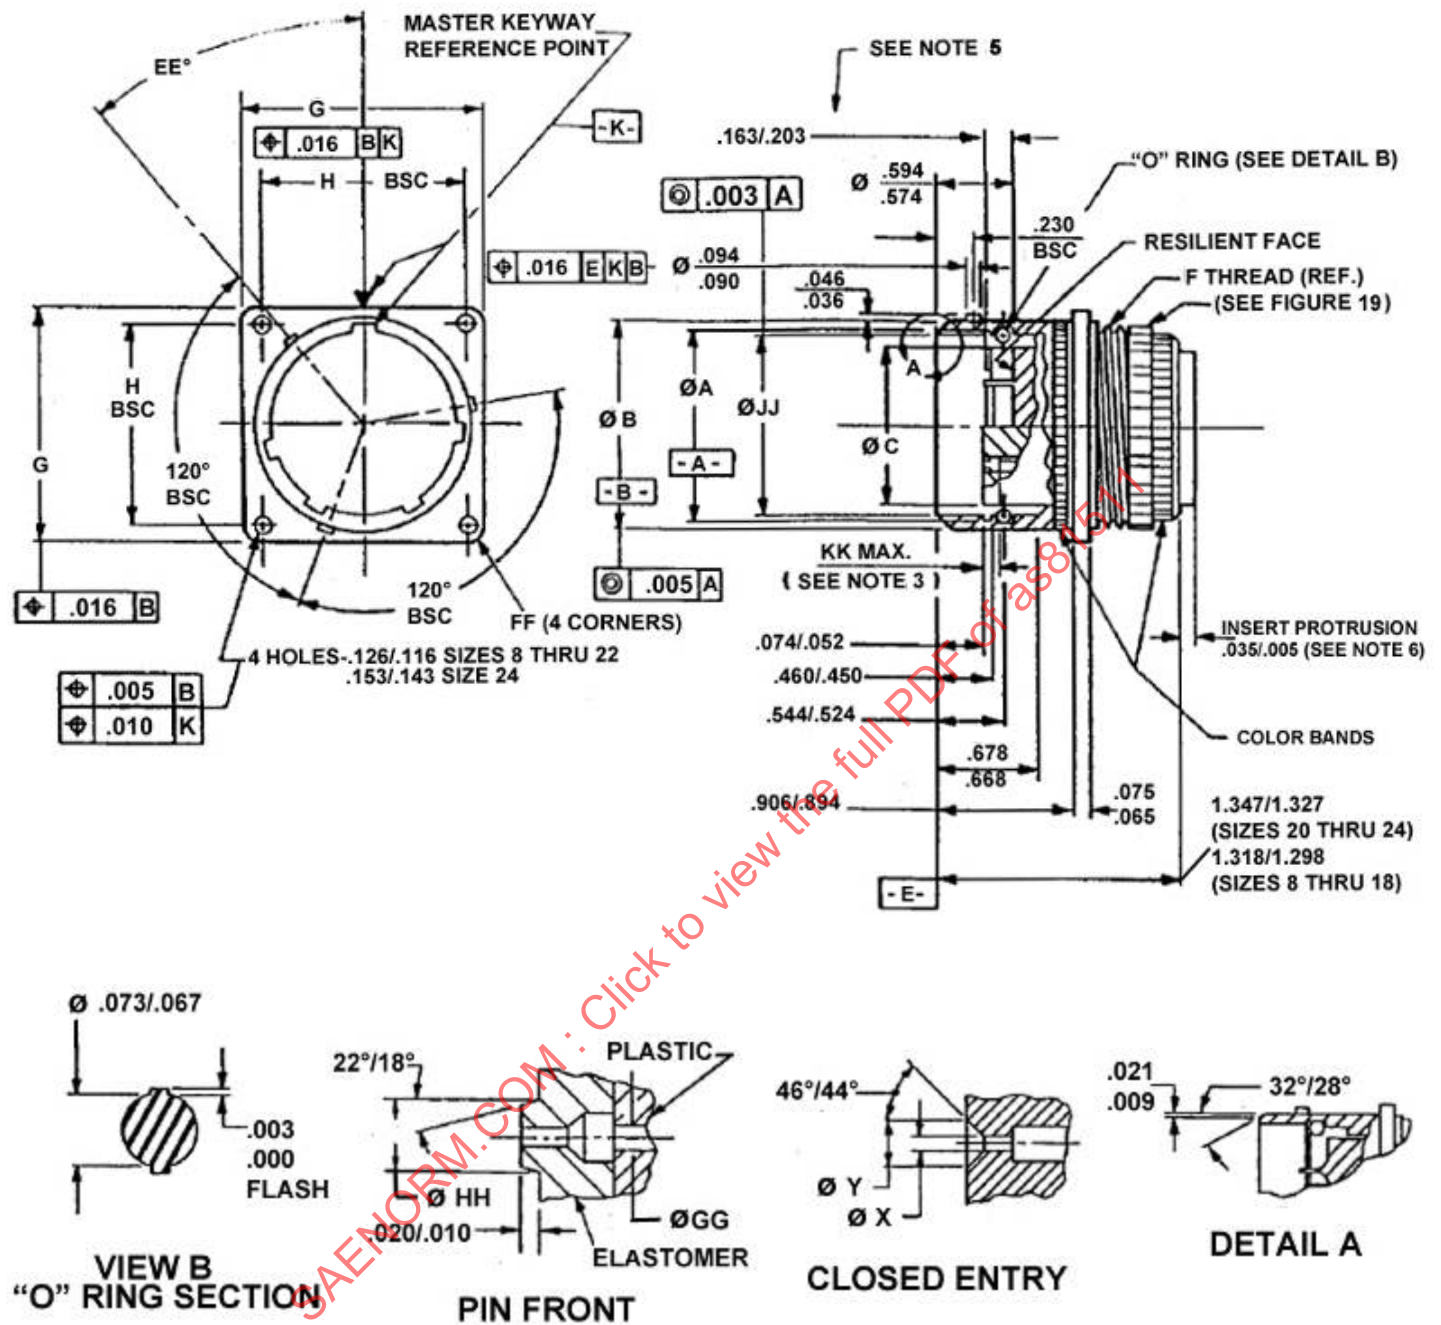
CONNECTOR, RECEPTACLE, ELECTRICAL, FLANGE MOUNT (SERIES 3)
